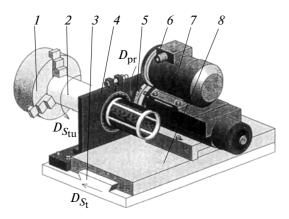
Device for producing slots in a filter element with rotation of the tool and blank: (1) chuck; (2) blank; (3) lathe's longitudinal support; (4) mobile stay; (5) tool; (6) tool assembly; (7) tool drive; (8) transverse slides of lathe support.
